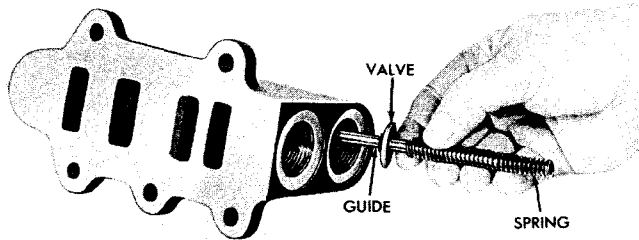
Removing or installing spring, oil filter check valve, and check valve guide
